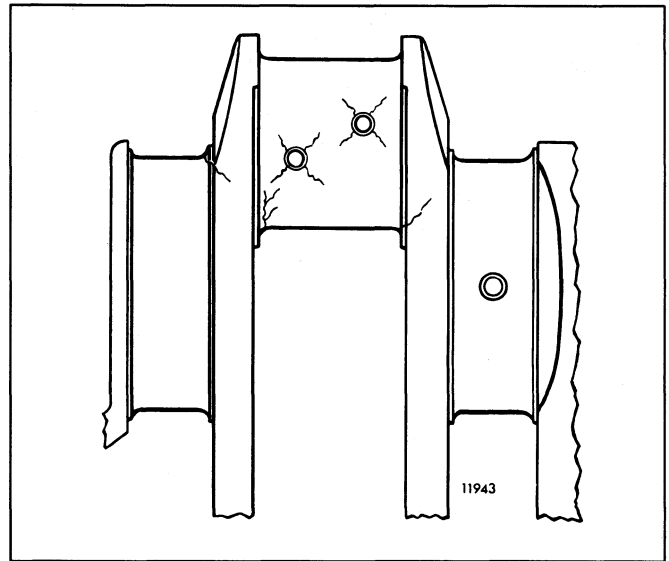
Crankshaft Fatigue Cracks
